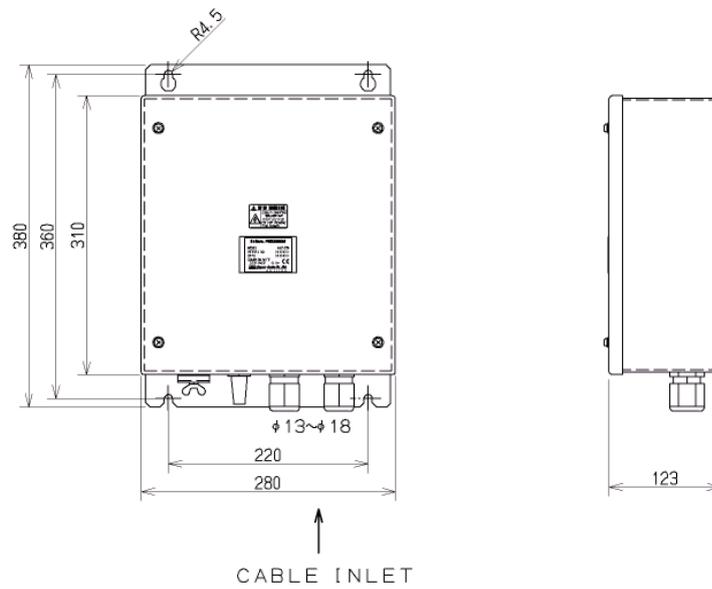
NJC-25 OUTLINE (Unit :mm)
